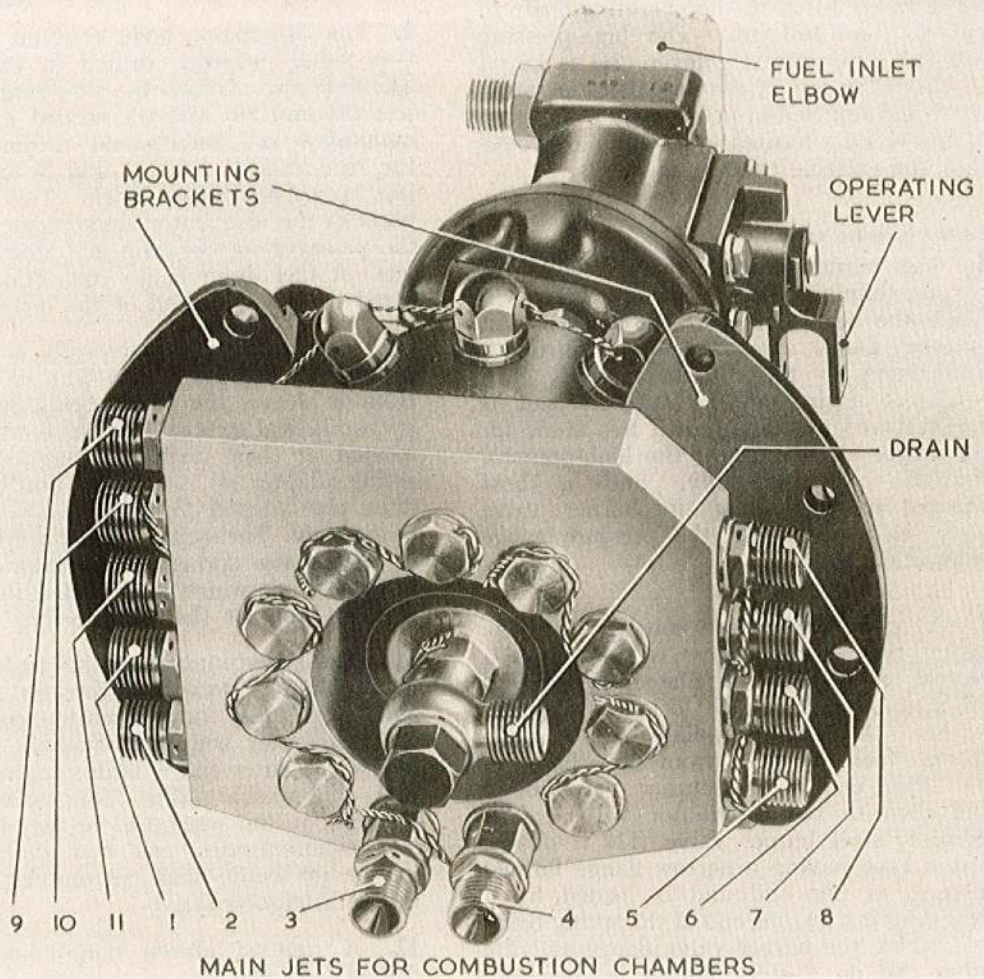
H.P. shut-off cock, burner pressure valve and distributor, rear view
